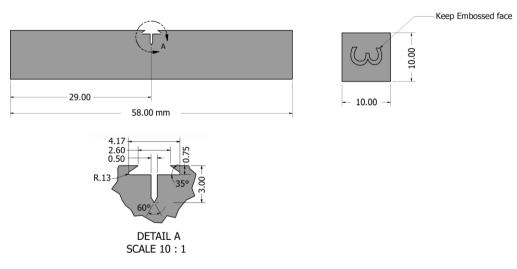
Drawing of the Charpy-type specimen before side-grooving.
